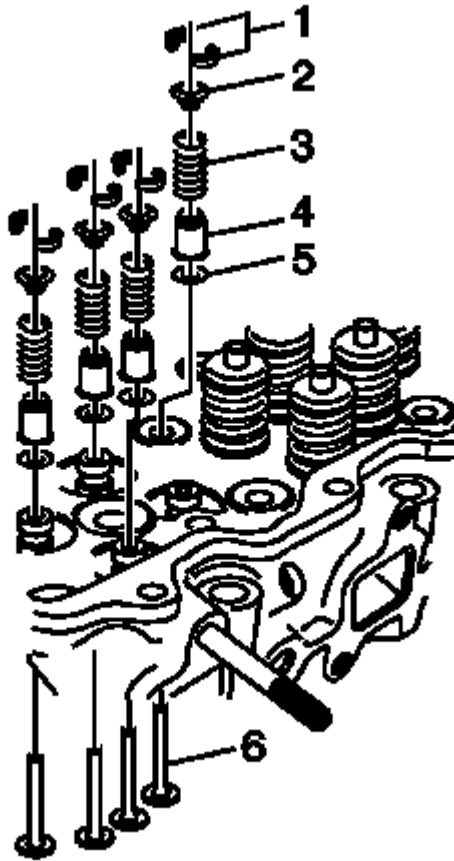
View Of Valve Stem Oil Seal & Valve Spring
